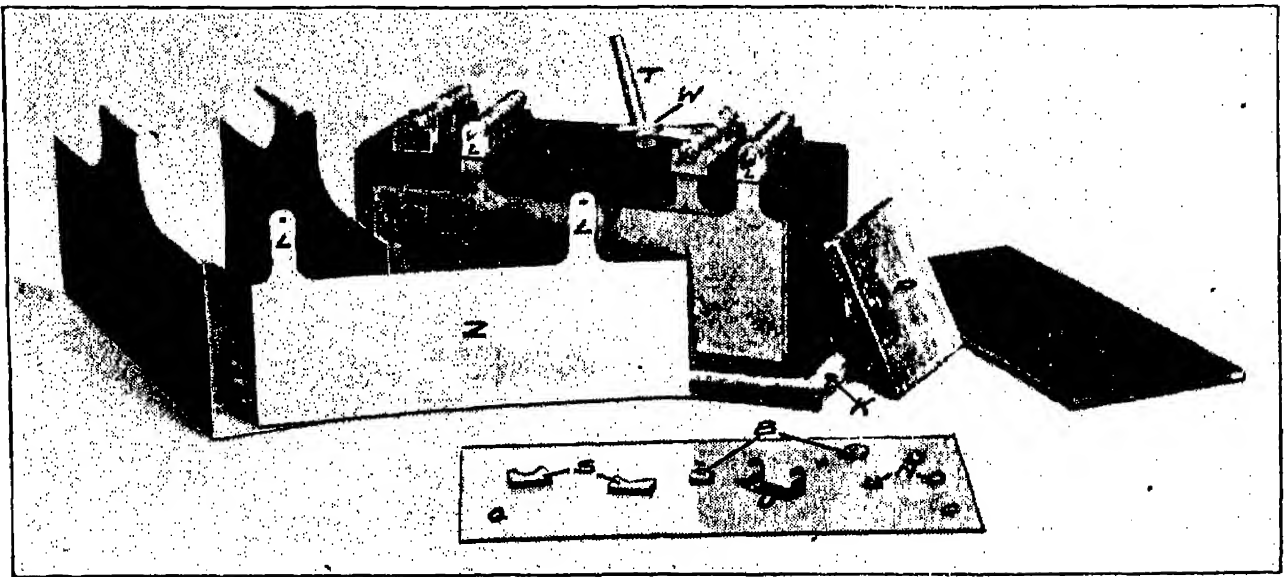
HALF-PLATE CONDENSER PARTS.
